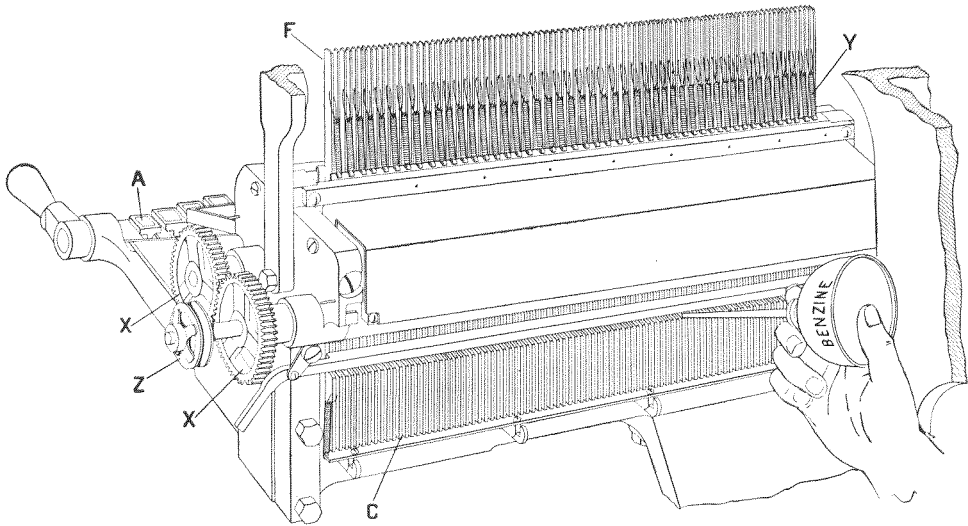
Rear view of the keyboard mechanism. *A*, keybutton; *C*, keyboard bar; *F*, keyreed; *X-X*, keyboard cam roll spur gears, which drive the keyboard rubber rolls; *Y*, keyreed spring; *Z*, keyboard cam pulley. This figure also shows the method of applying benzine to clean the keyboard bars.
